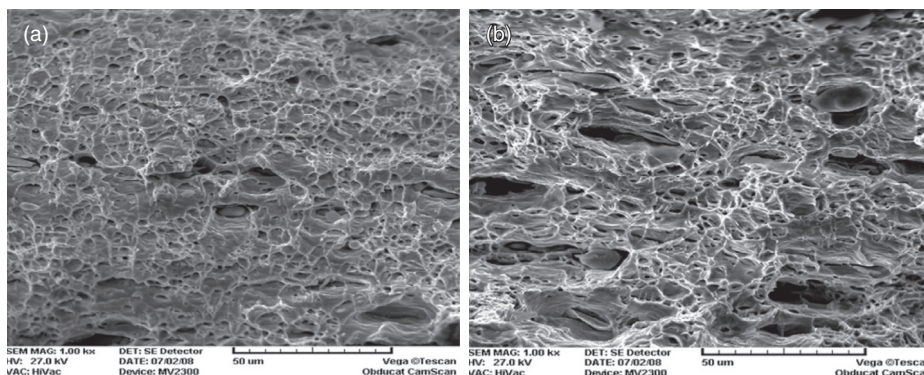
Fracture surface of the copper layer ECA-extruded in different conditions: (a) proof specimen and (b) composite specimen.
